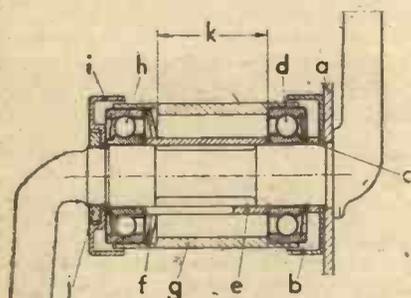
Section of a bottom-bracket fitted with single-row rigid ball bearings.
